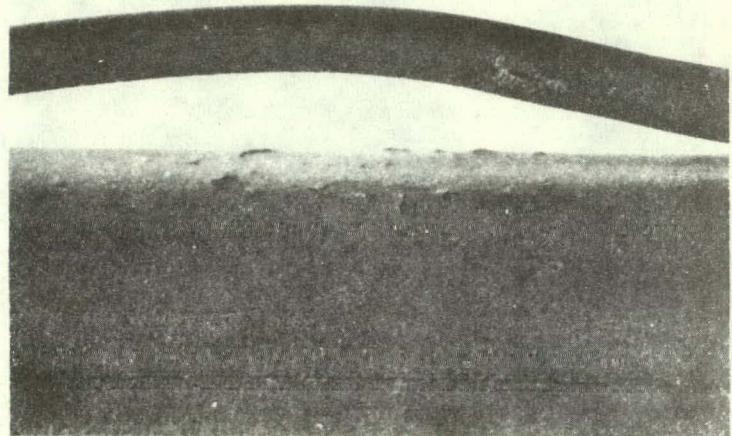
Maximum bow between thermocouple and heater rod. About 0.051 inch maximum. The weld spacing is one inch.
